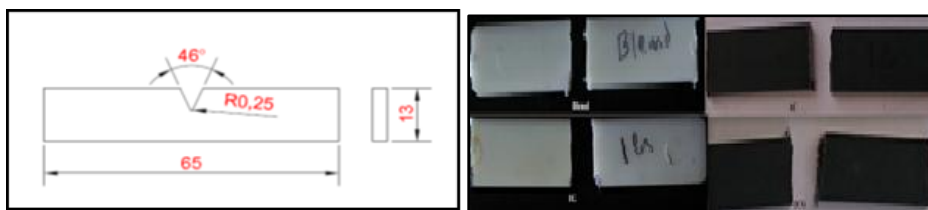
Specimen dimension for impact test as per ASTM 256 and fractured specimens composites
